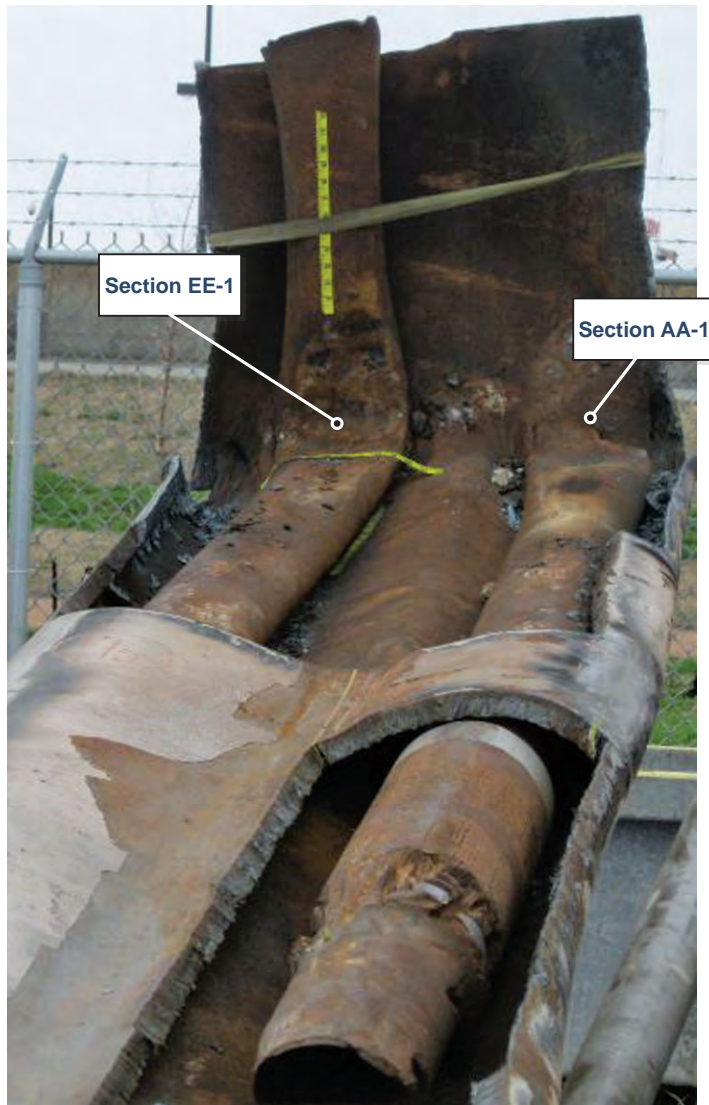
Drill Pipe in the Recovered Riser Section at the Kink End with the Drill Pipe Sections EE-1, AA-1 (with EE-3 Attached)
